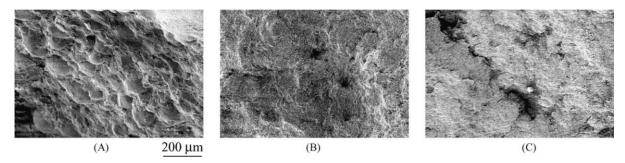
Mode of fracture during machining—surfaces of the flakes.
